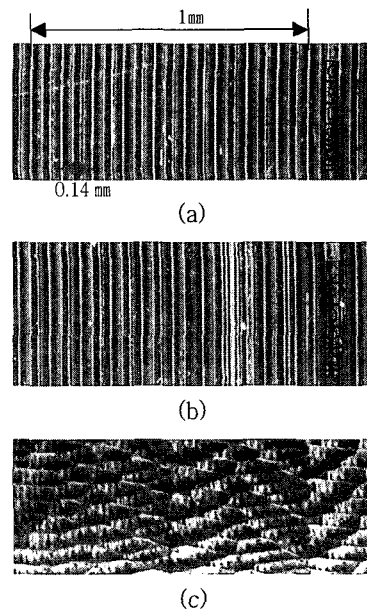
(a) Normal surface (b) Surface defect (c) Surface without mandrel
